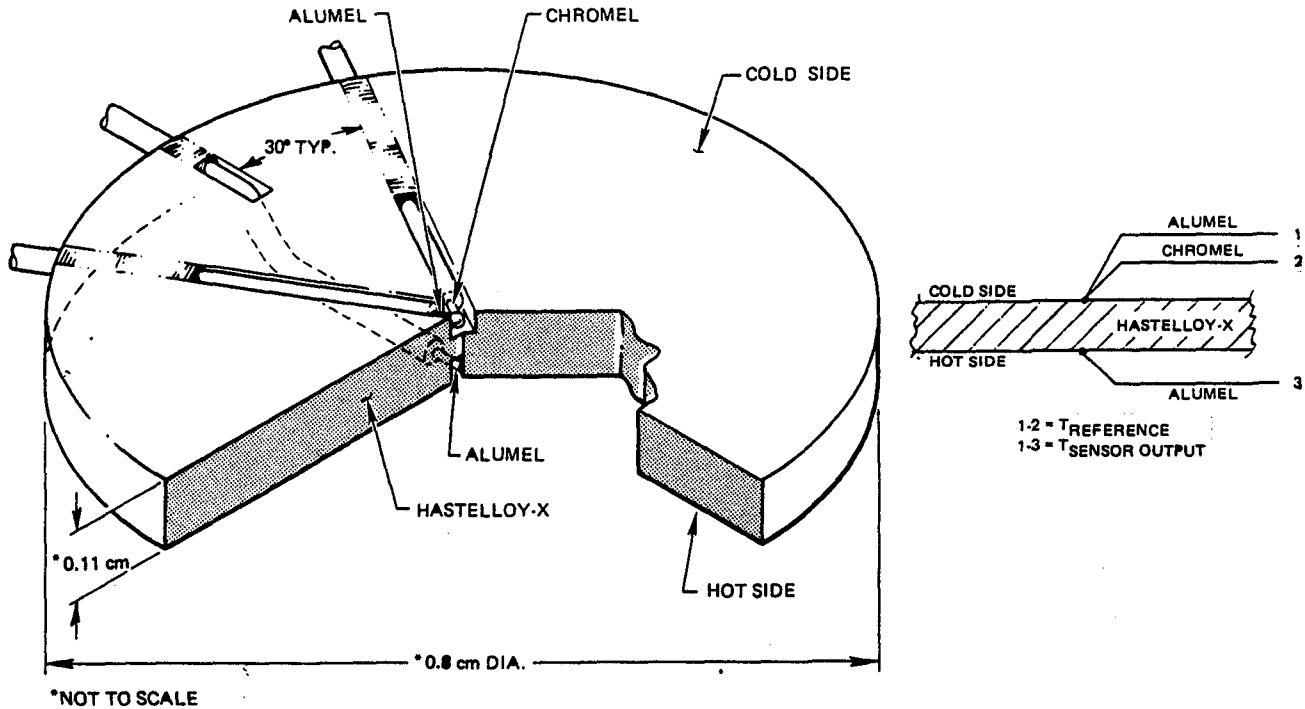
Construction Details and Electrical Schematic of the Embedded Thermocouple Sensor Fabricated with Single Conductor Swaged Wire
